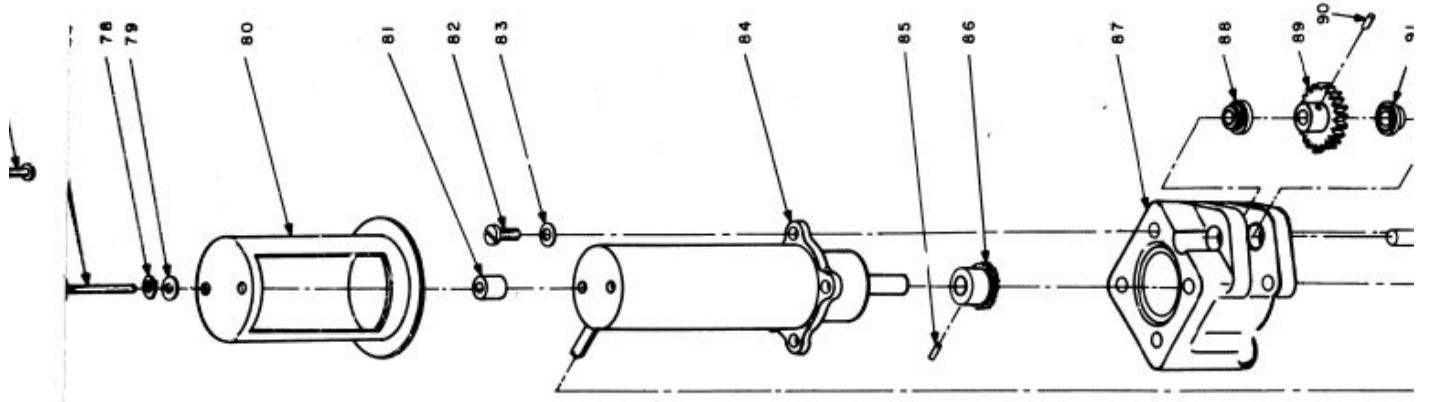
TURRET ASSEMBLY 2A2 (EXPLODED VIEW)
